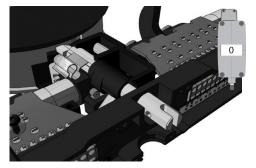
Interlocking shaft in unlatched position. ISM is open.
